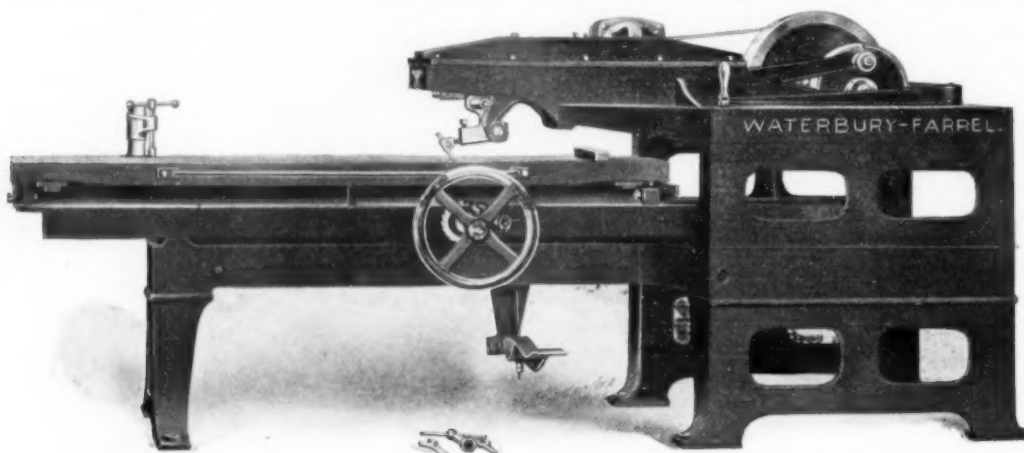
SCRATCHING MACHINE OF THE STEVER TYPE, MOTOR DRIVEN. MADE BY THE WATERBURY FARREL FOUNDRY AND MACHINE COMPANY, WATERBURY, CONN.
